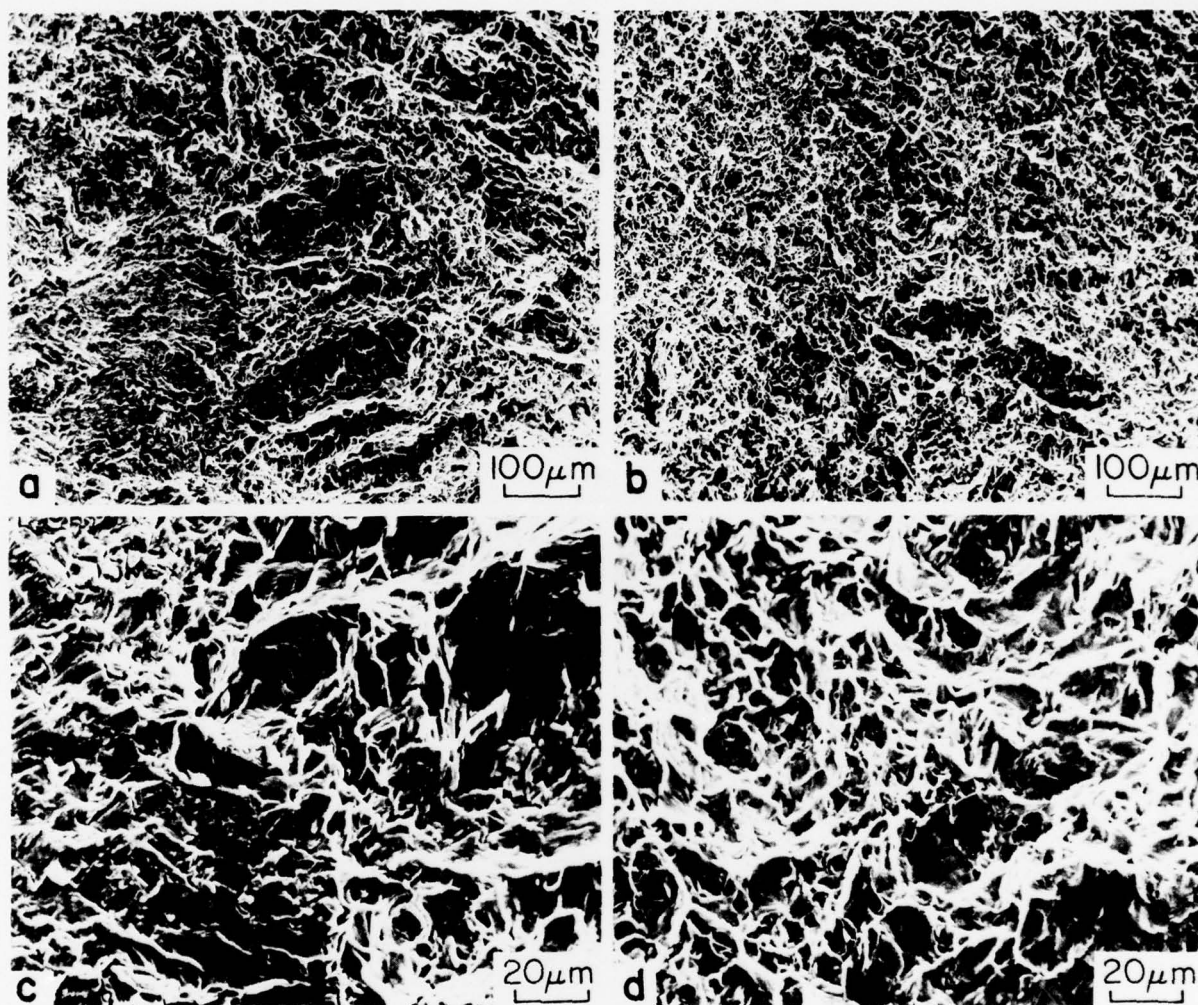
Fracture surface of Condition 1  $K_{IC}$  specimen: (a,c) fatigue precrack to rapid fracture transition; (b,d) rapid fracture.
